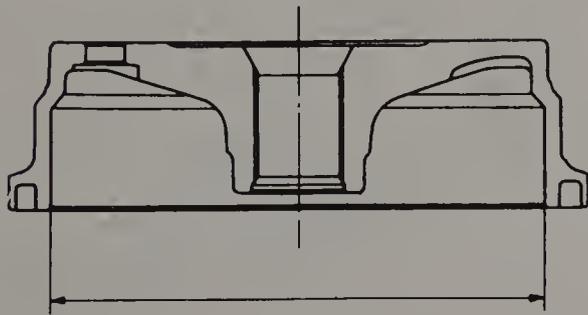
Brake drum inside diameter measurement (Sec 32)
